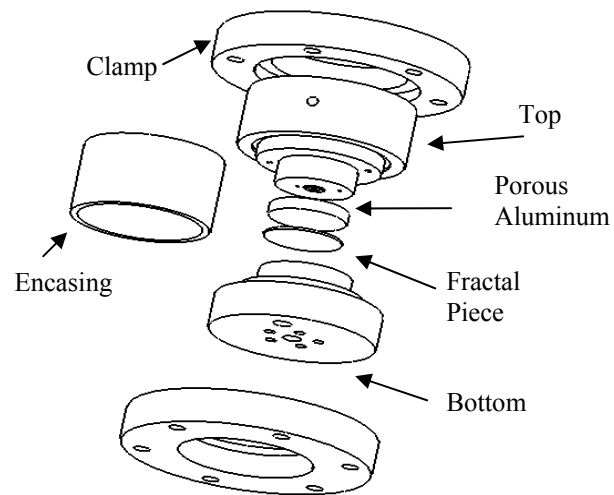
Exploded view of test fixture assembly with the parts labeled.
